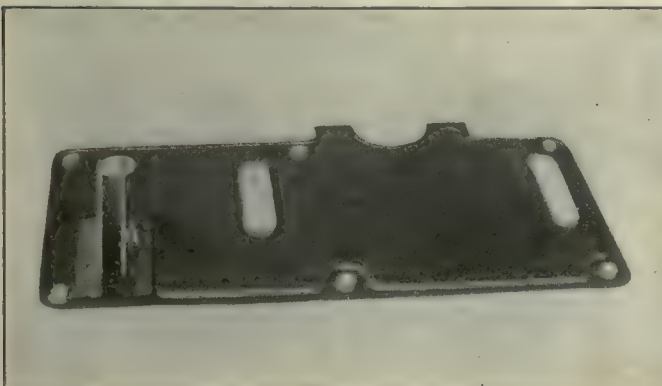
WELDED BRACKETS ON FLOOR PLATES
